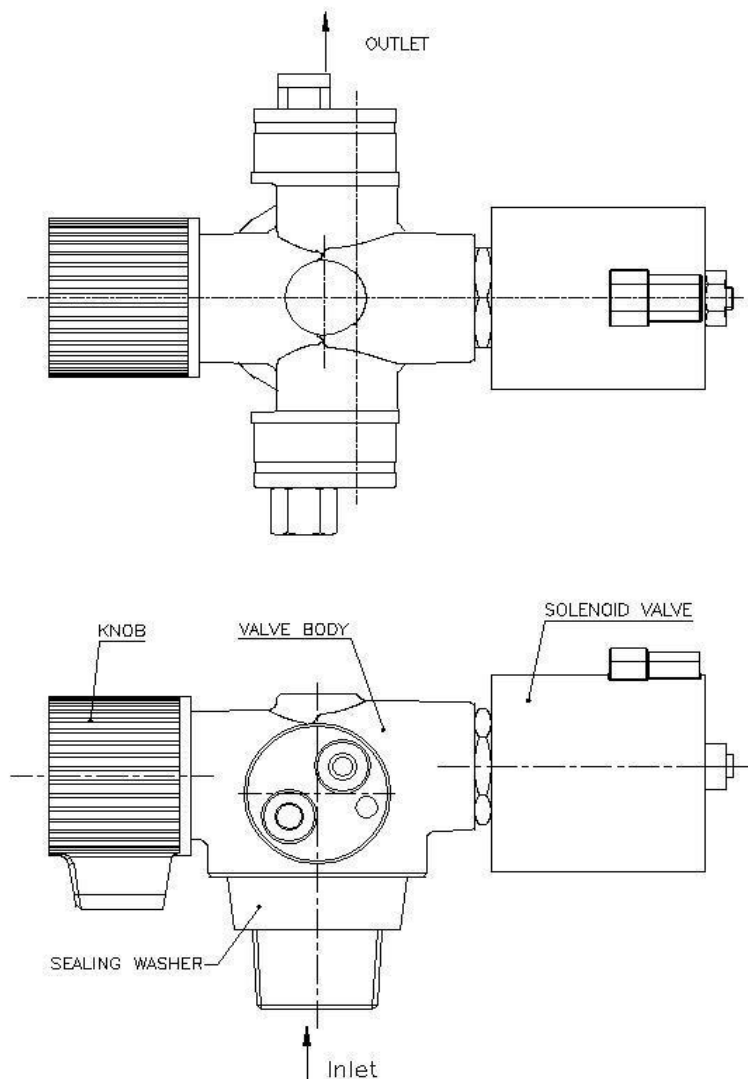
ILLUSTRATION OF TYPICAL KNOB OPERATED O-RING GLAND SEAL VALVE WITH SOFT SEAT
